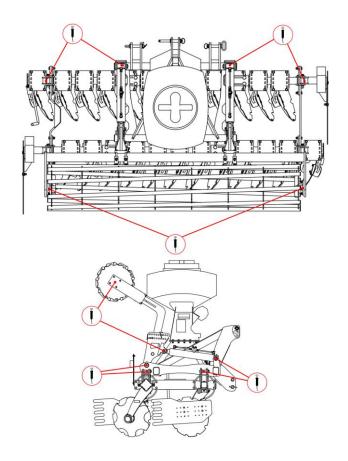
Lubrication points for the GAL-E disc harrow (roller and seed drill version)
